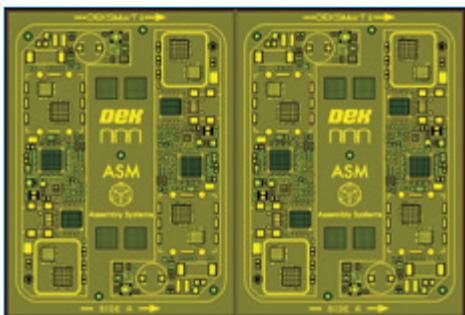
Test vehicle PCB with BGAs, passive devices, and shields.
